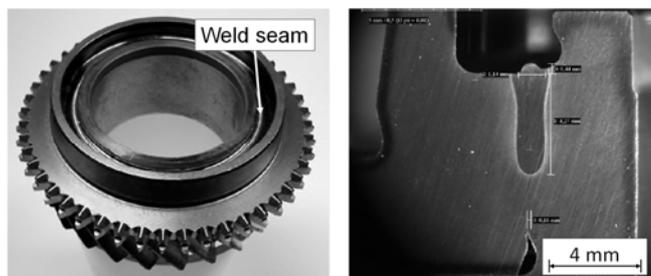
Gear wheel with cross-section, weld depth 4 mm
